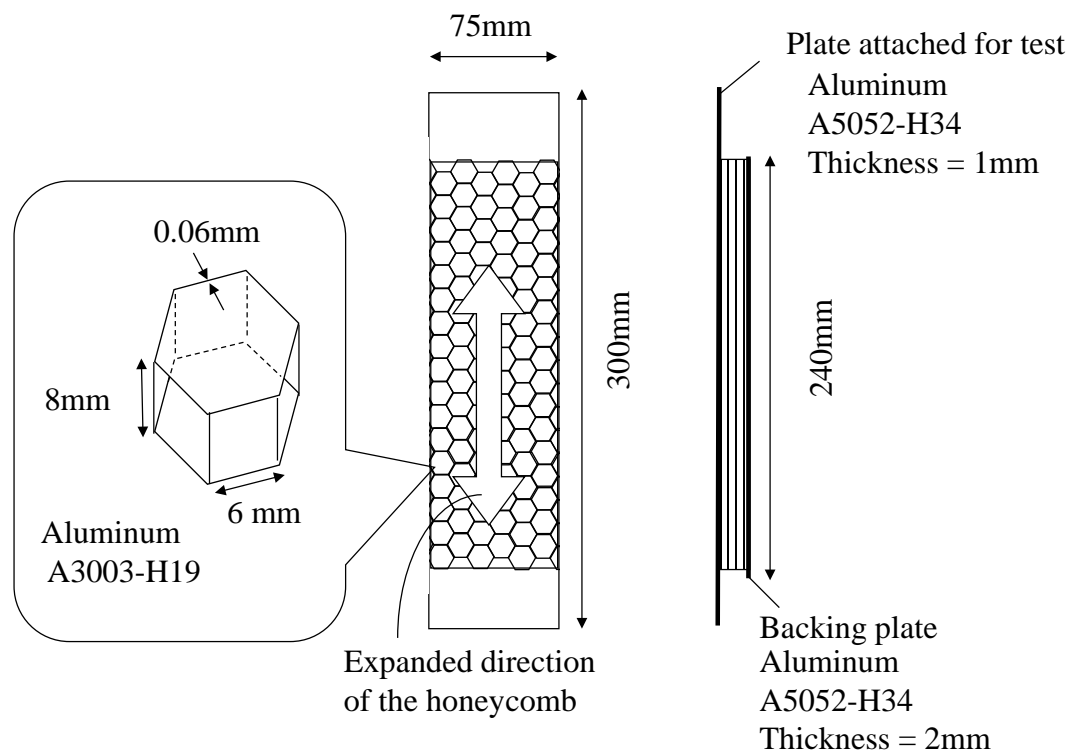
Shape and dimensions of honeycomb and specimens for peeling test.
